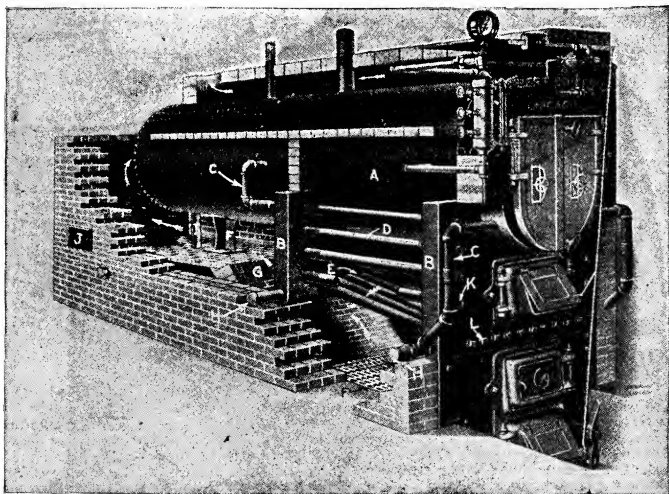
,762.—Herbert fire tube boiler with water tube down draught grate. *The parts are:* A, fire tube boiler; B, water legs; C, circulating pipes; D, side tubes connecting water legs; E, water tube grate; F, lower shaking grate; G, fire-brick bridge-wall; H, clean-out plugs; K-L, brass clean-out plugs.
